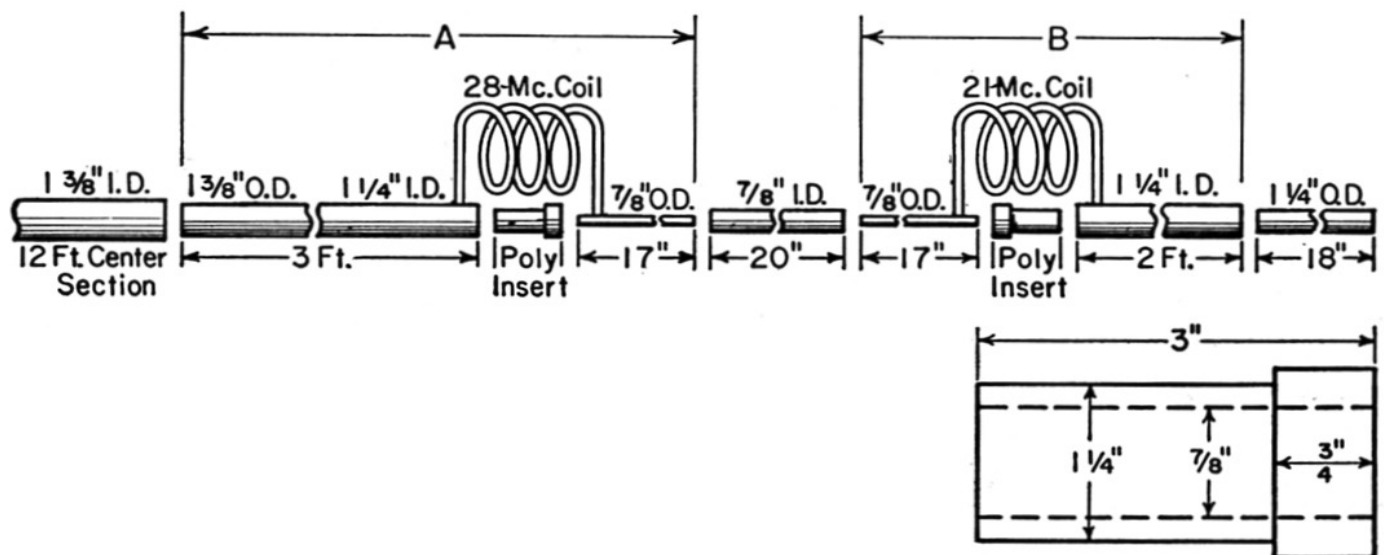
Breakdown of the element assembly. Sections A and B are assembled permanently. Other sections may be telescoping for adjustment. Detail of the polystyrene inserts is at the right. The 7/8 inch o.d. sections should be inserted to a depth of $2\frac{3}{4}$ inches.
